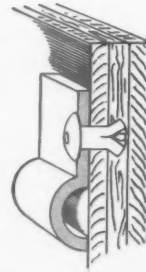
A blind head can be formed inside the wood. This application is particularly useful when it is desirable to have one surface of the wood unmarred.
